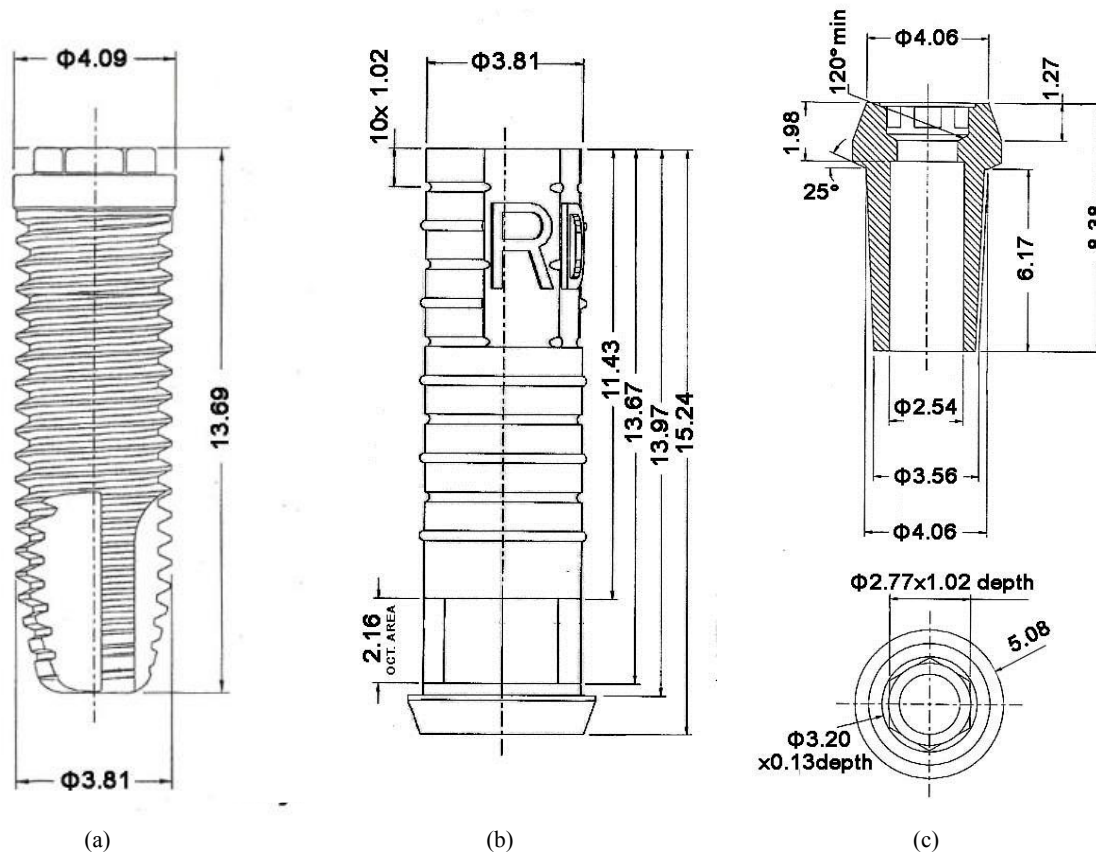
(a) Restore RBM 3.75x13mm implant; (b) Premachined UCLA ab. before casting; (c) Restore COC abutment straight
